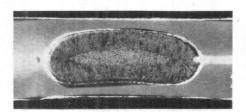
Spot weld in aluminium alloy (Alclad, D.T.D.610).
